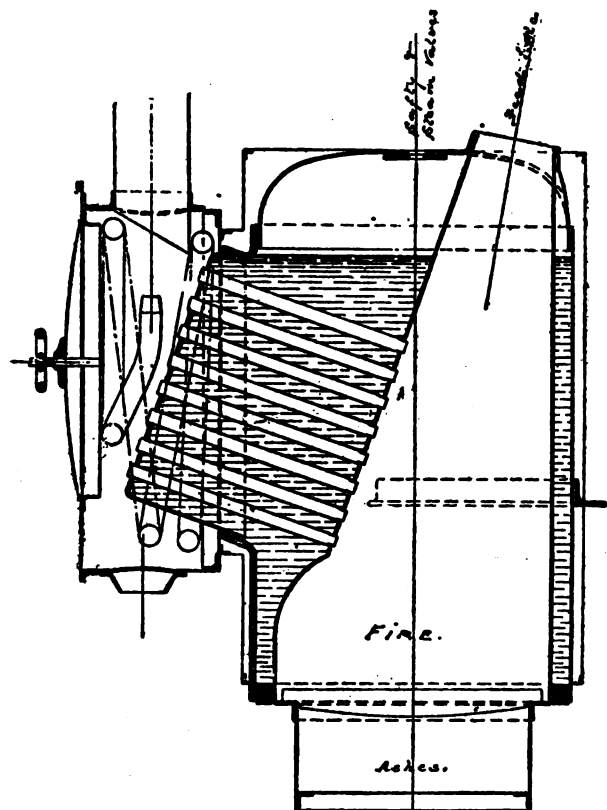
Section of Boiler of "Gorton" Steam Wagon.
